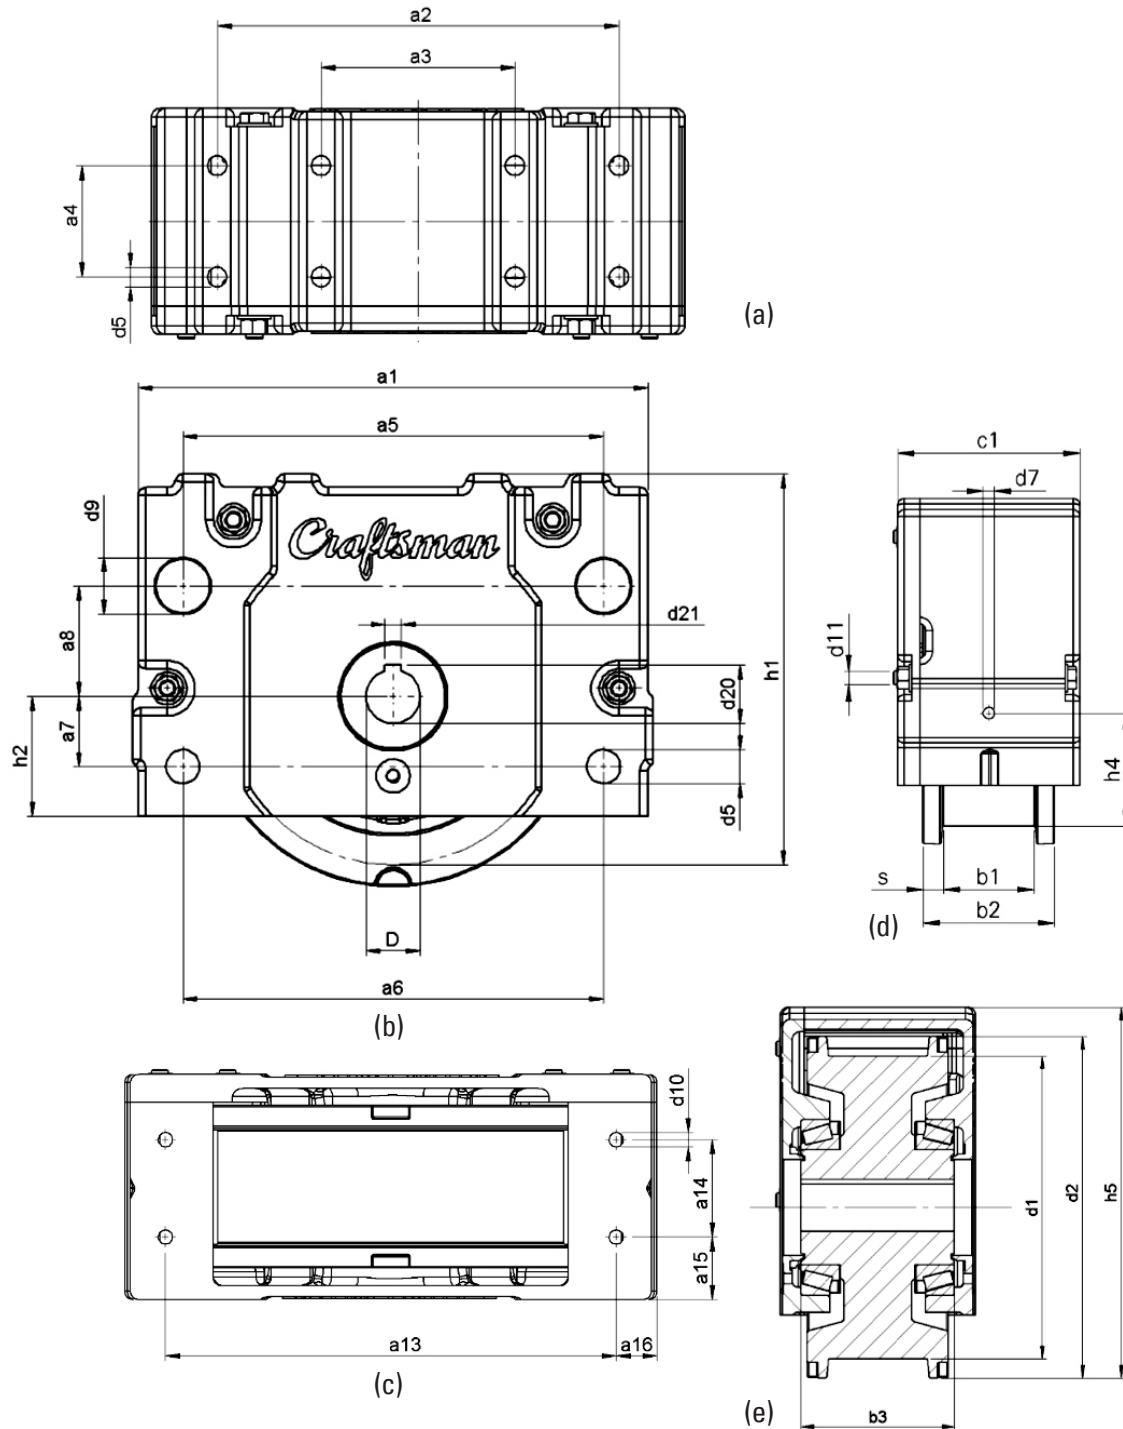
Wheel block dimensions - CRWB 250 TO 500
